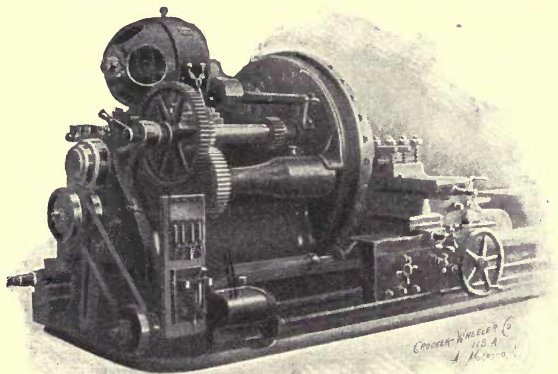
Semi-Enclosed Motor Driving a 62" Lathe.
